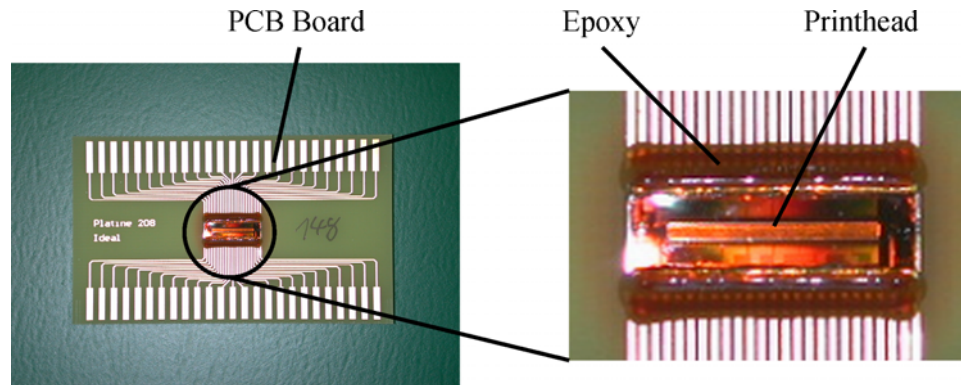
Printhead bonded on a commercial PCB board. The wire bonds are protected with an epoxy based adhesive.
